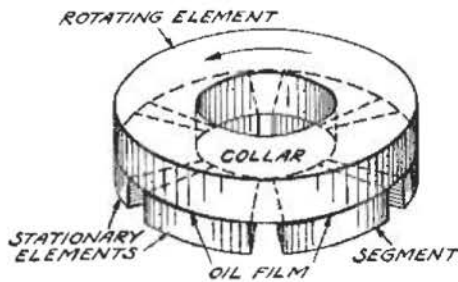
Basic elements of Kingsbury Thrust Bearing, showing wedge-shaped oil films.
